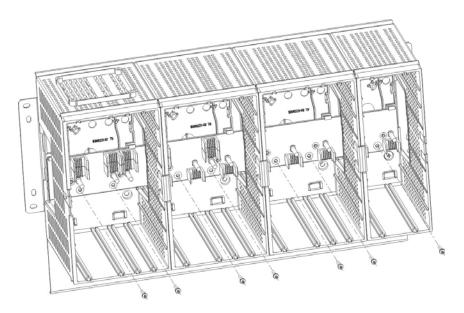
ACE3600 Motherboard on Metal Chassis
